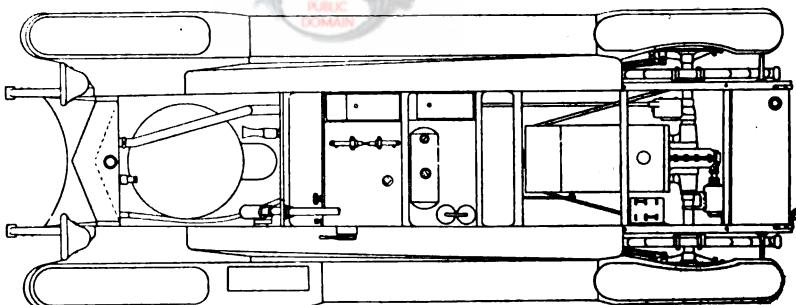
Plan View of Stanley Steam-Car Chassis
